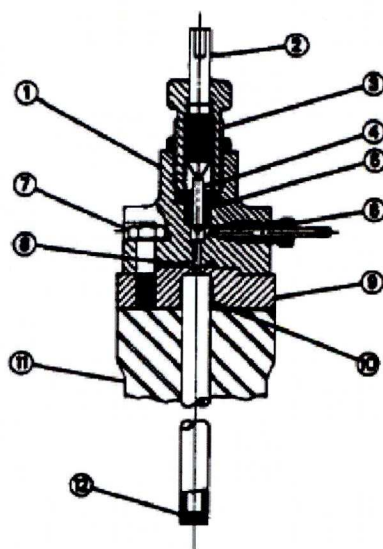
Schematic drawing of Roe's titanium alloy valve and sapphire tube assembly: (1) valve body, (2) valve stem drive handle, (3) stem drive and packing gland, (4) non-rotating stem, (5) packing assembly, (6) gas inlet port for 1/16-in tubing, (7) assembly screw (total of four), (8) Viton O-ring seal, (9) tube mounting flange, (10) epoxy sealant, (11) spinner turbine, (12) sapphire tube.
